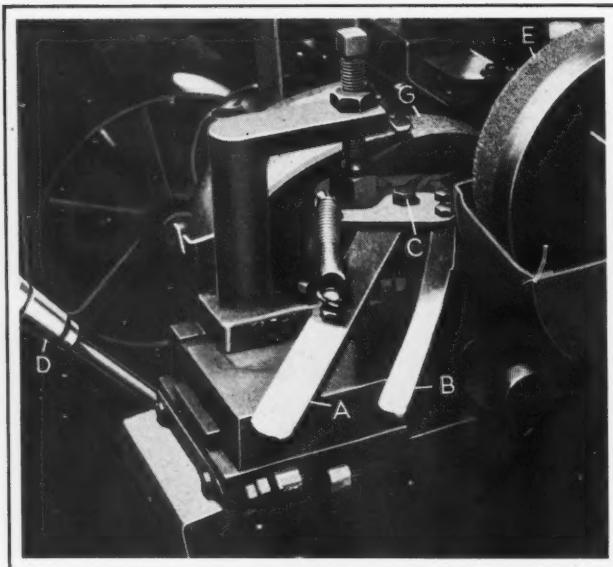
In This Machine the Tooth is Swung Rapidly to Two Positions to Grind the Face and Top Clearance
